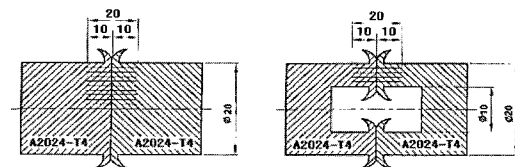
Hardness measurement point of perpendicular direction from the welding section
